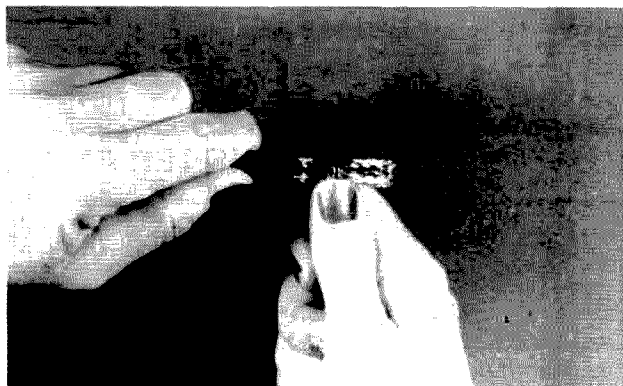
Photo B. Use a sharp knife to cut through soldered braid and insulation.
